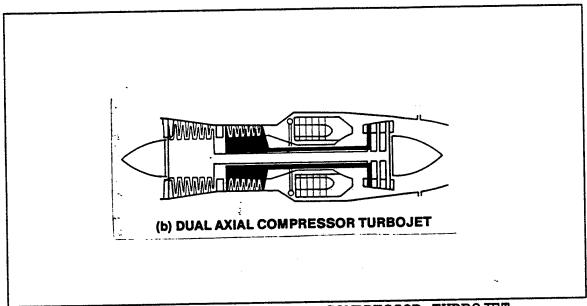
B. DUAL AXIAL COMPRESSOR TURBOJET
